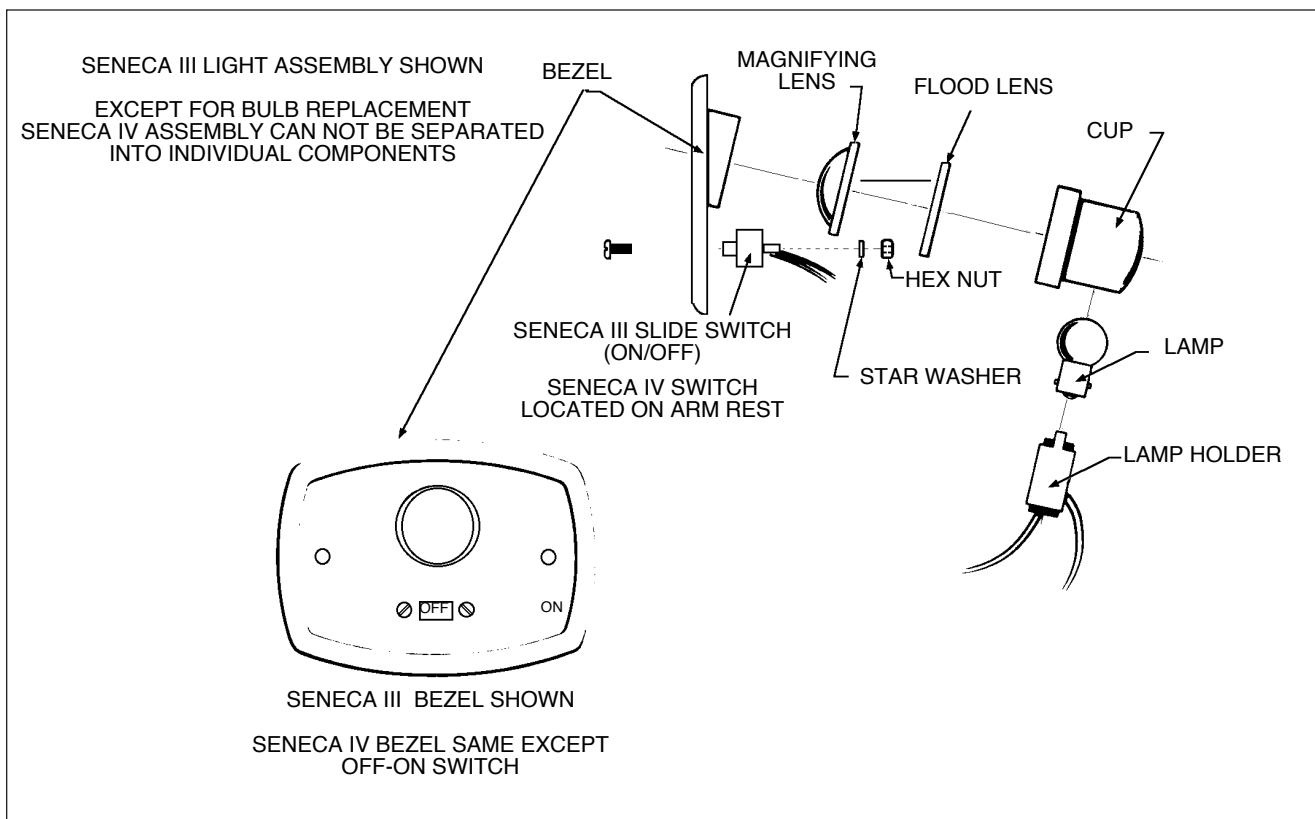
Reading and Courtesy Light Assembly (Whelen)
